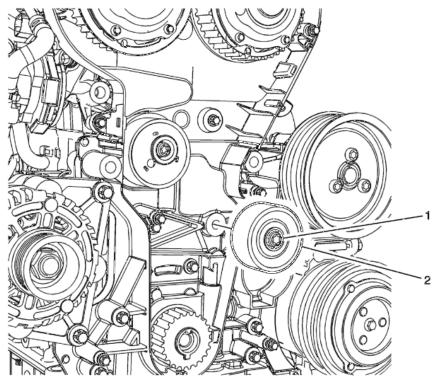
Timing Belt Idler Pulley And Bolt Courtesy of GENERAL MOTORS COMPANY
